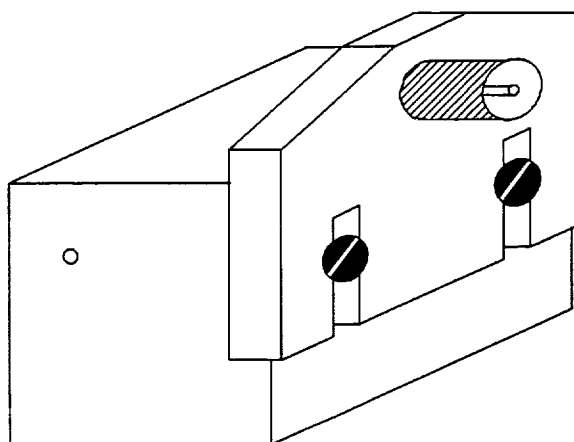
Copper test fixture with detachable launching flange. The connector is a K-sparkplug launcher.
